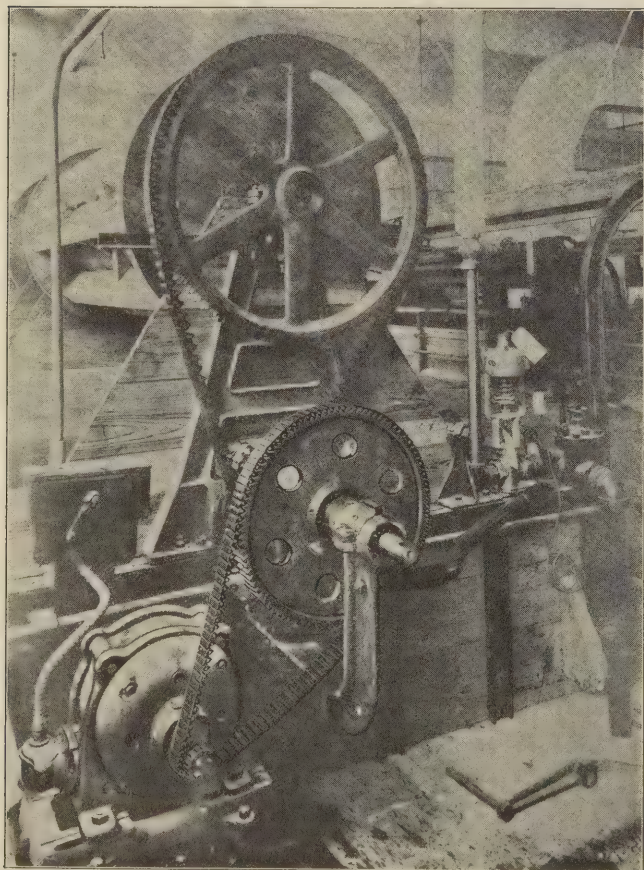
Individual Motor Drive on Rodney Hunt Reel Machine
